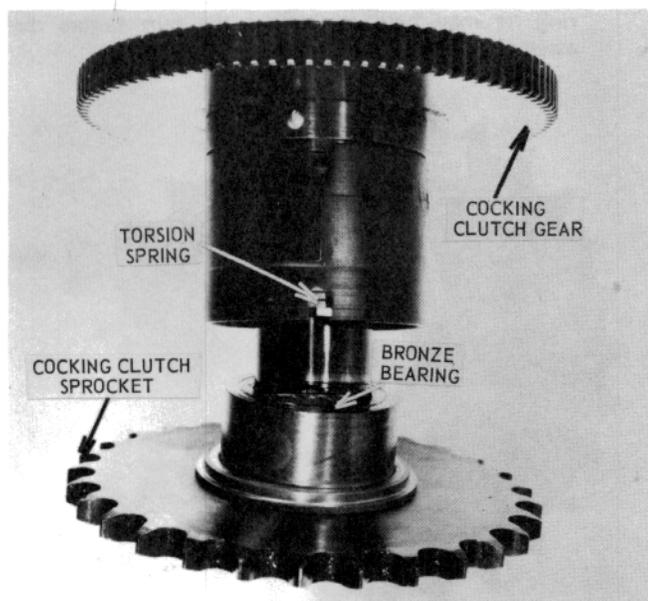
Cocking Clutch Sprocket and Cocking Clutch Gear Separation
